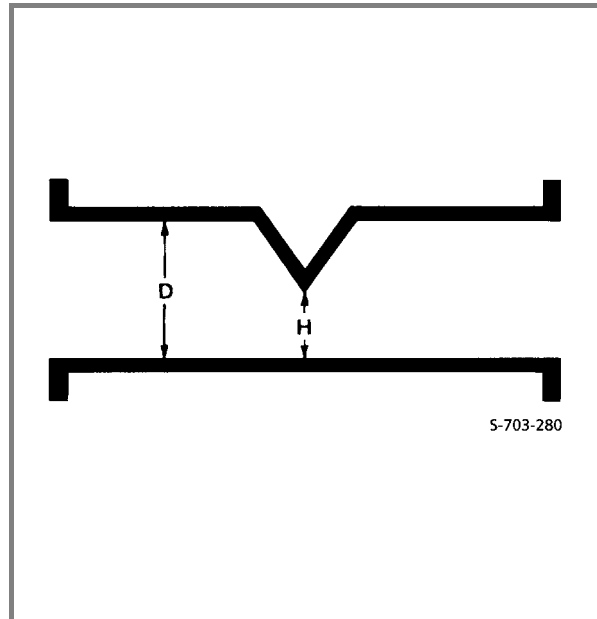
WEDGE ELEMENT CROSS-SECTION VIEW
